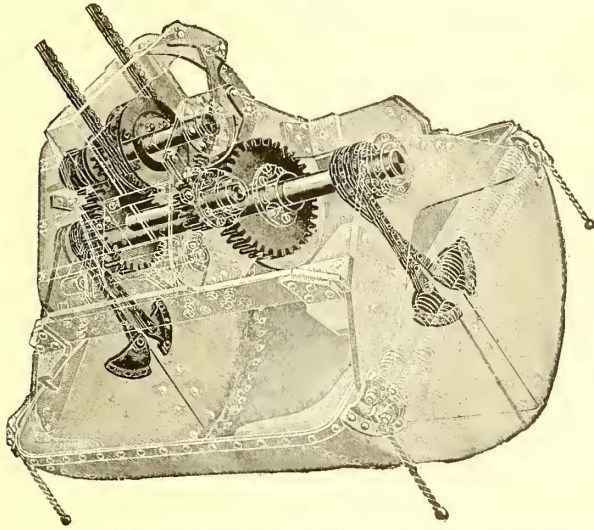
COAL SHOVEL—ELEVATED RAILWAY TERMINAL STATION, NEW YORK.
